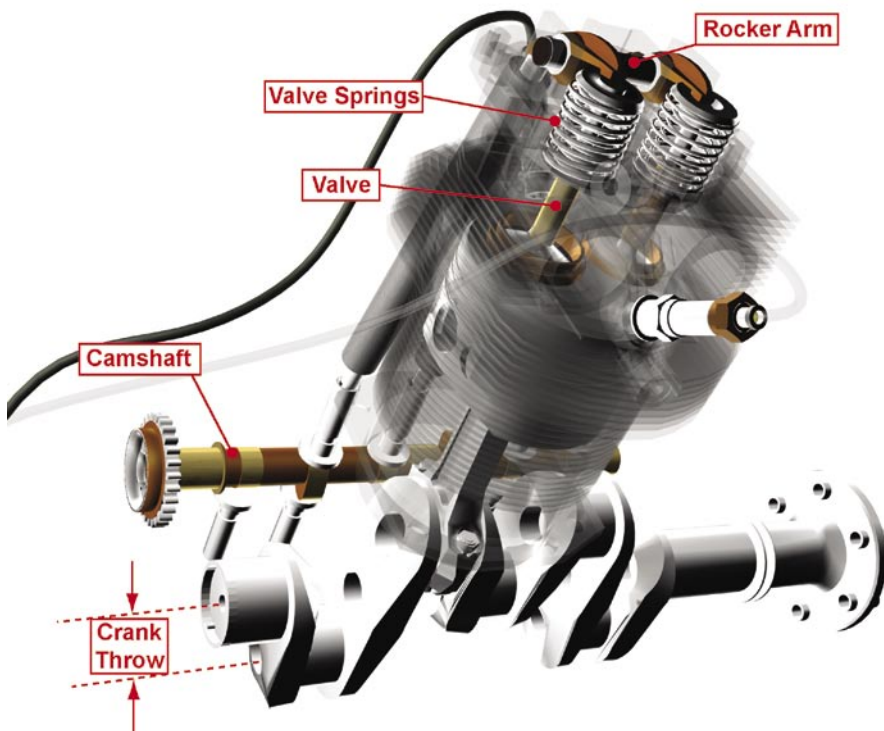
Cutaway of Cylinder Head and Crankshaft.
